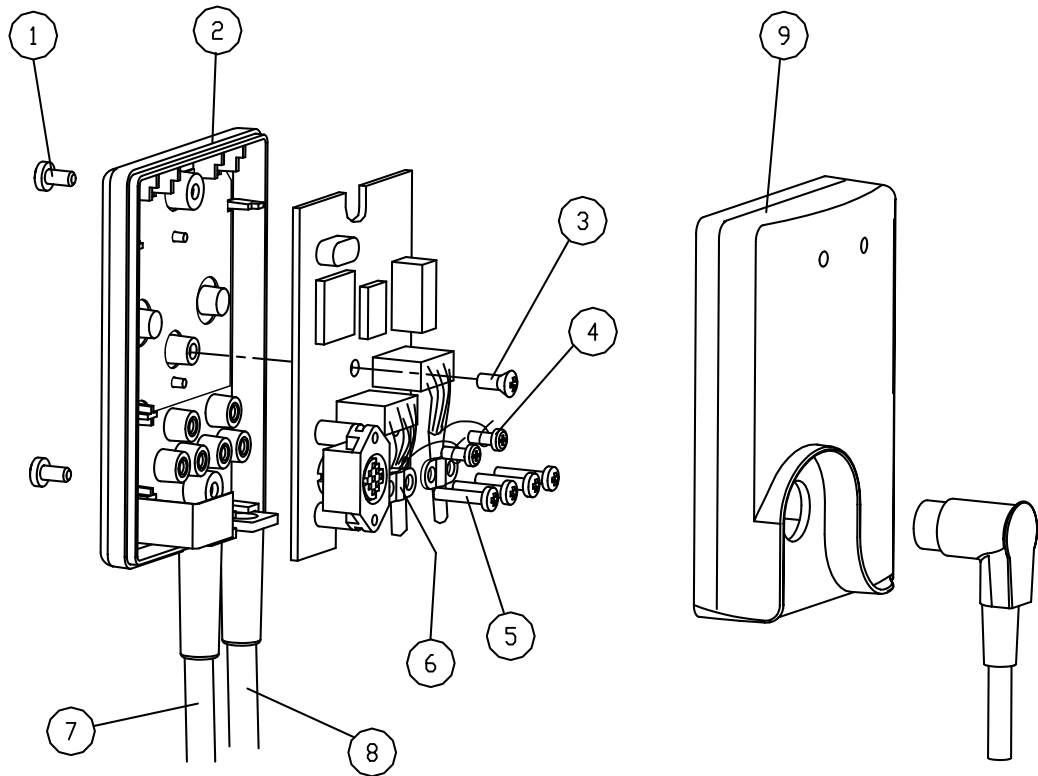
Exploded view of the Device Interfacing module, N-DISVENT
